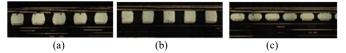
(a) Spherical (b) cylindrical and (c) elliptical shape of solder joints at different locations of the same BGA package.
